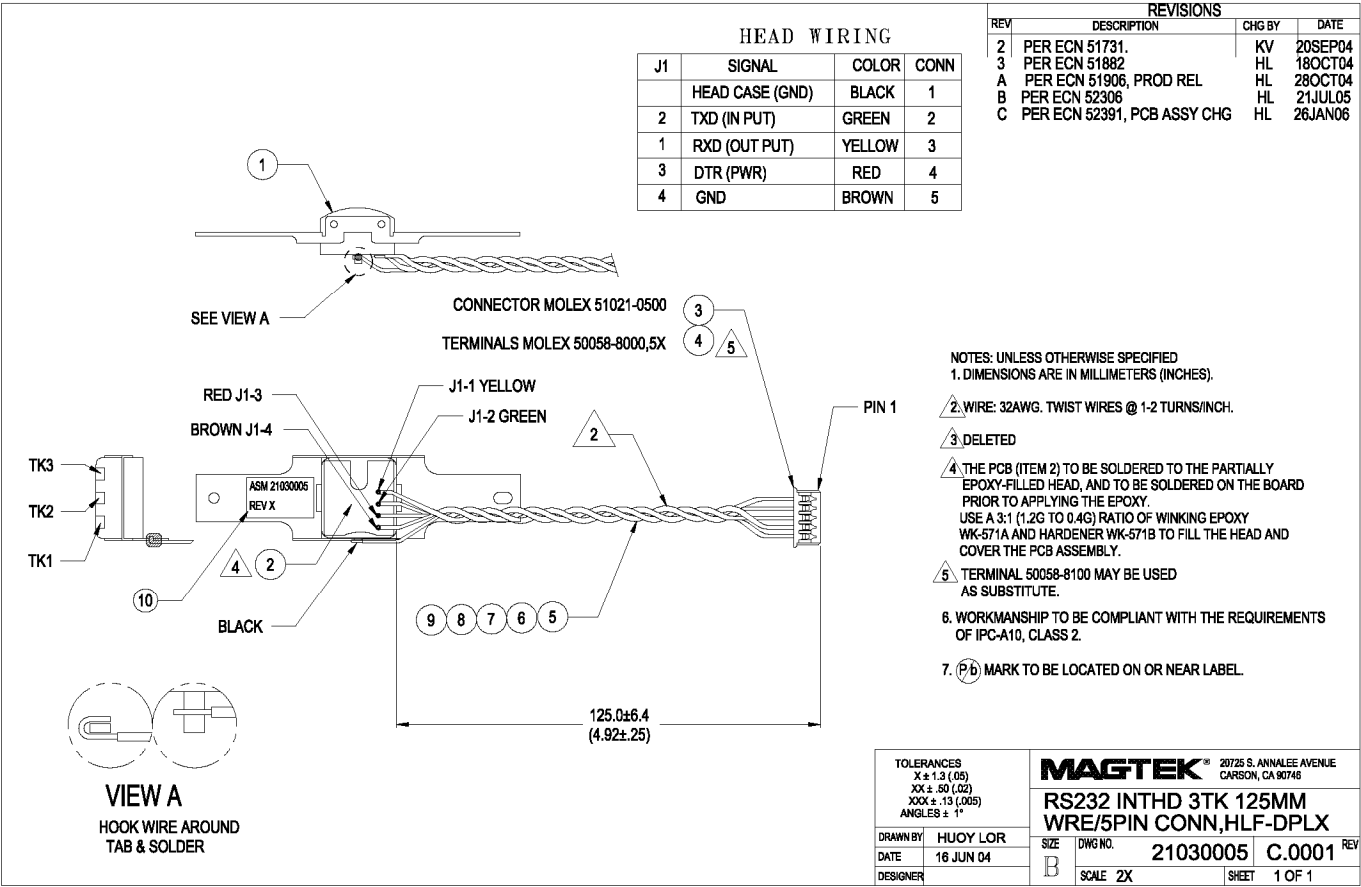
RS-232 IntelliHead, Spring Assembly, 125mm wire/5-pin connector
